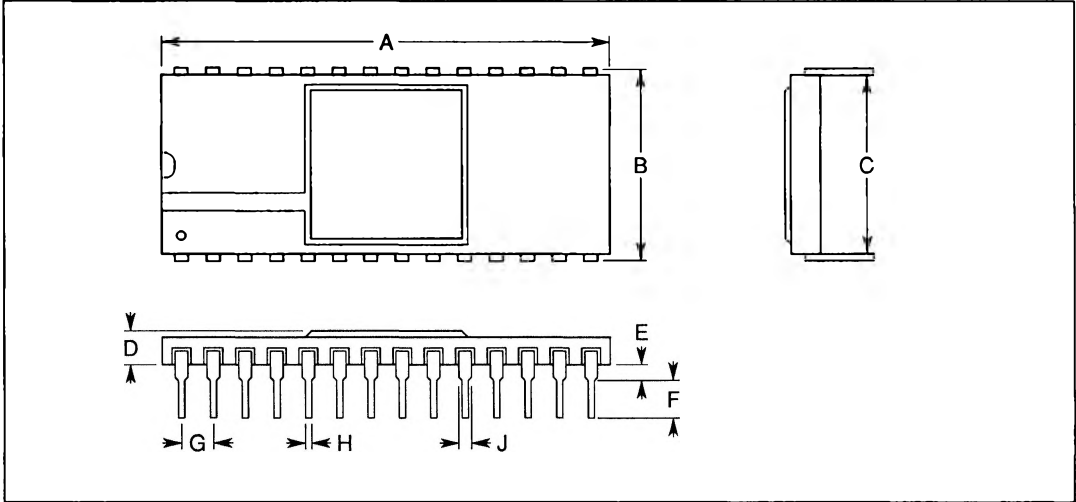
28 pin ceramic dual-in-line package dimensions
